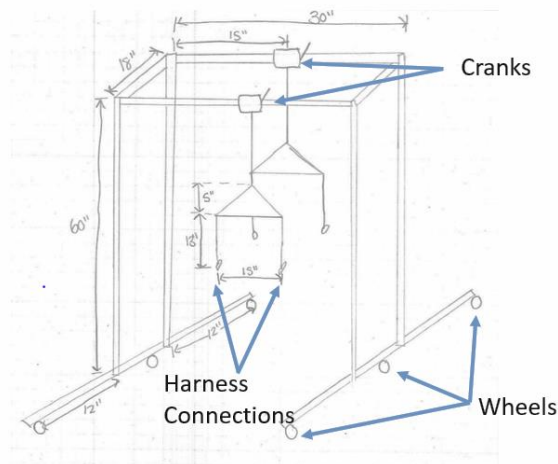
Dimensions and Isometric Sketch for Double Crankshaft Sling
